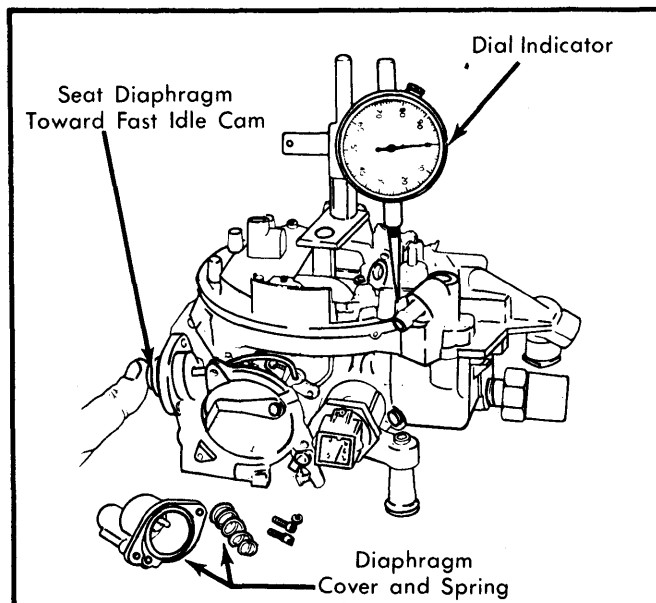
Adjusting Choke Control Diaphragm (At 75°F Position)
